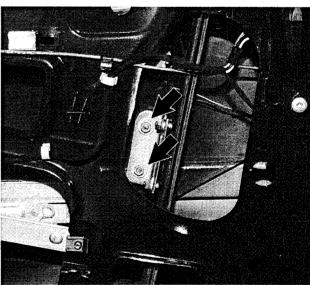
Rear guide rail lower mounting bolts in bottom of door (arrows).
